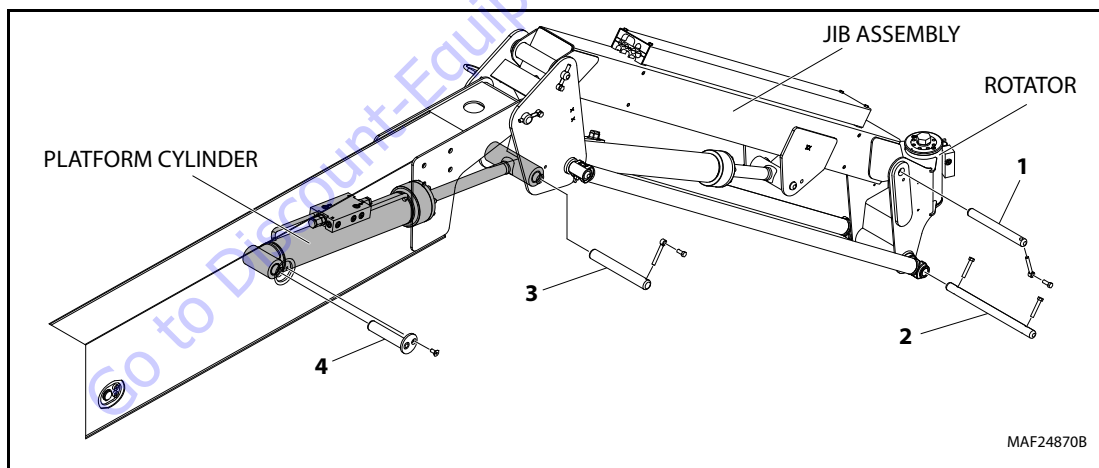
Removal/Installation of Components - Rotator and Platform Slave Level Cylinder
